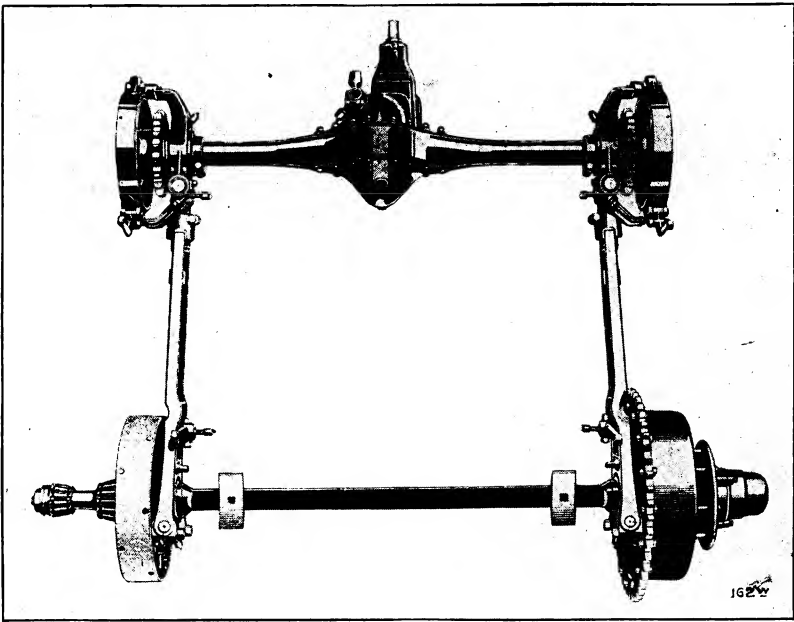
Timken Standard Jackshaft for Side-Chain Drive
